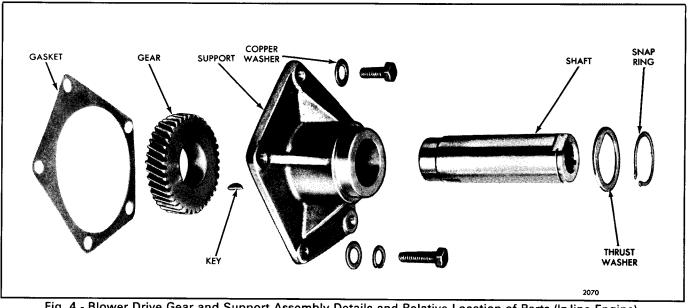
Blower Drive Gear and Support Assembly Details and Relative Location of Parts (In-line Engine)
